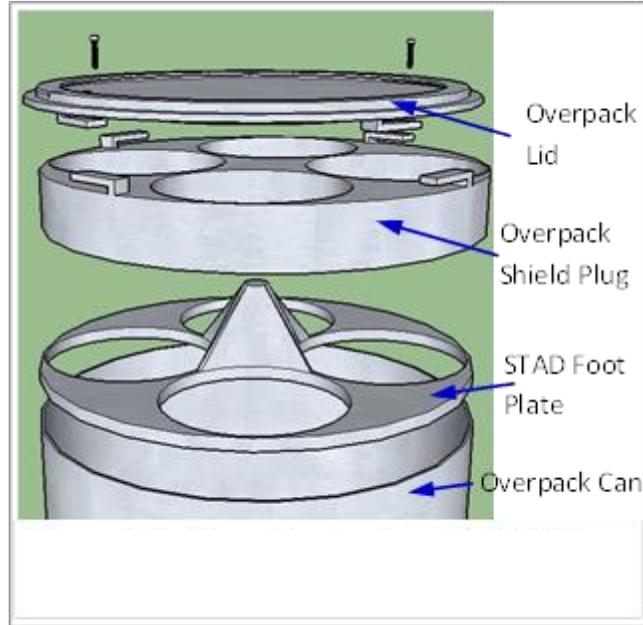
Assembly Drawing of a STAD Overpack with a Mechanical Lid Closure.
